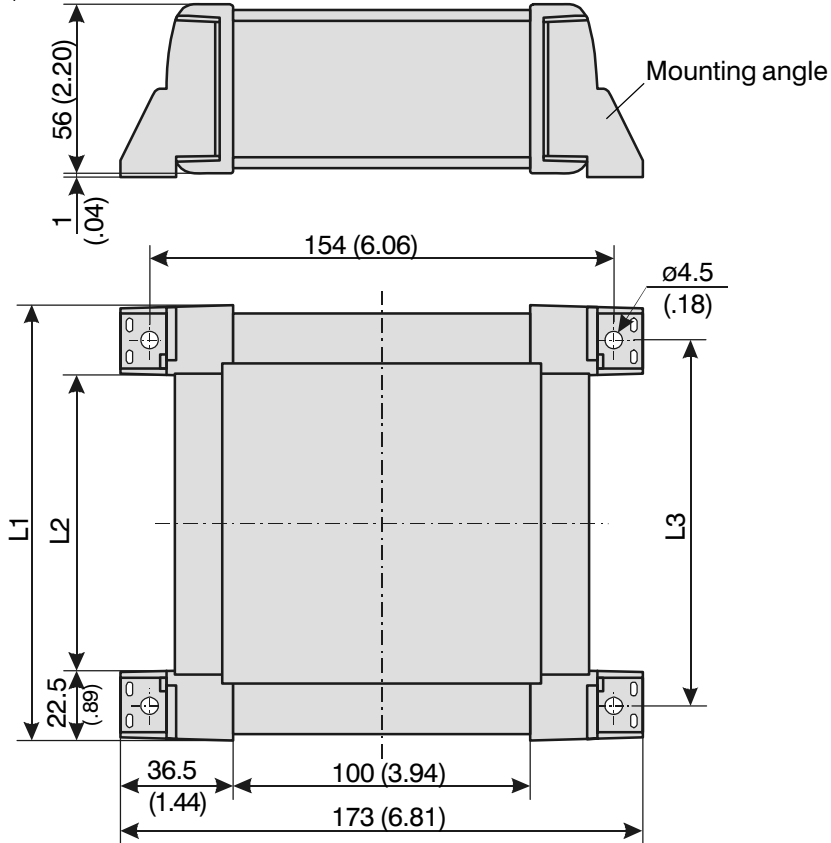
Dimensions of the controller 1800/1801 with mounting angle (not to scale)
